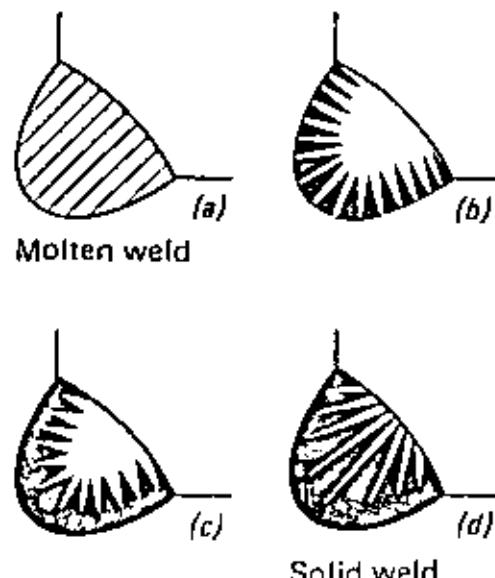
A molten fillet weld (a) starts to solidify along the sides next to the plate (b). Solidification proceeds as shown in (c) and (d).
